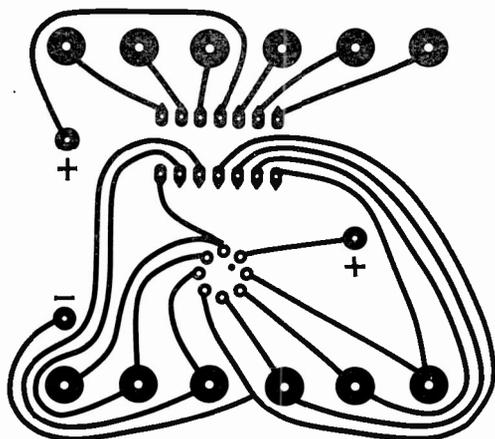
Actual-size foil pattern for the socket-contact board. Switch S1 cutout and mounting holes are dependent on the particular switch you are using.
